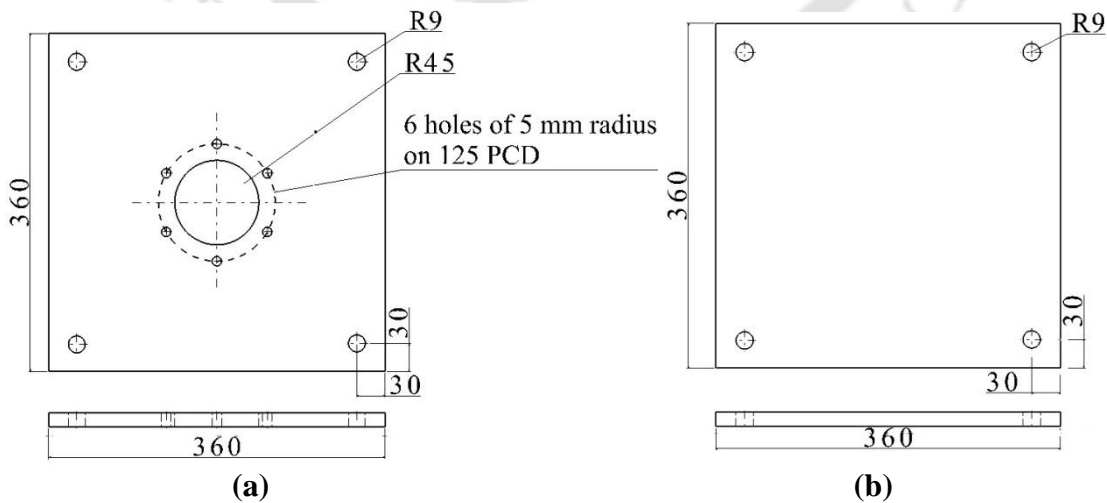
Detailed 2-D drawing of (a) upper supporting plate (b) lower supporting plate (All dimensions are in mm).
